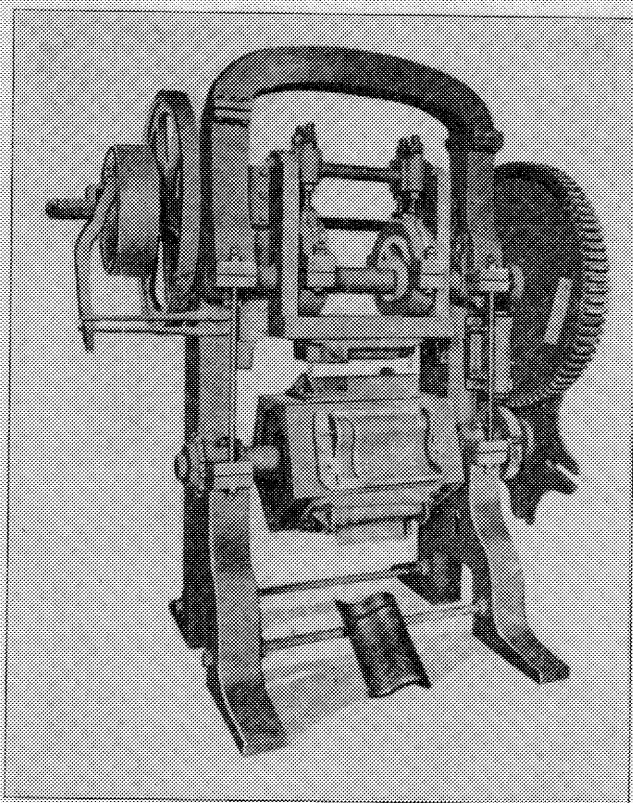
The Crawford & McCrimmon Roofing Tile Press.
